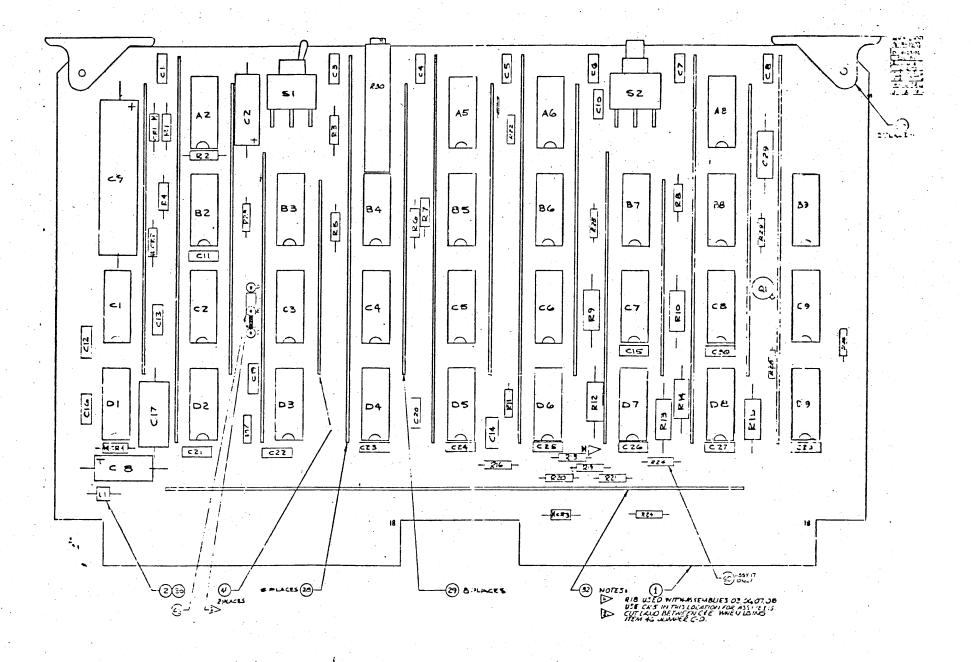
Error Card Assembly (Dwg. No. 1040610)
